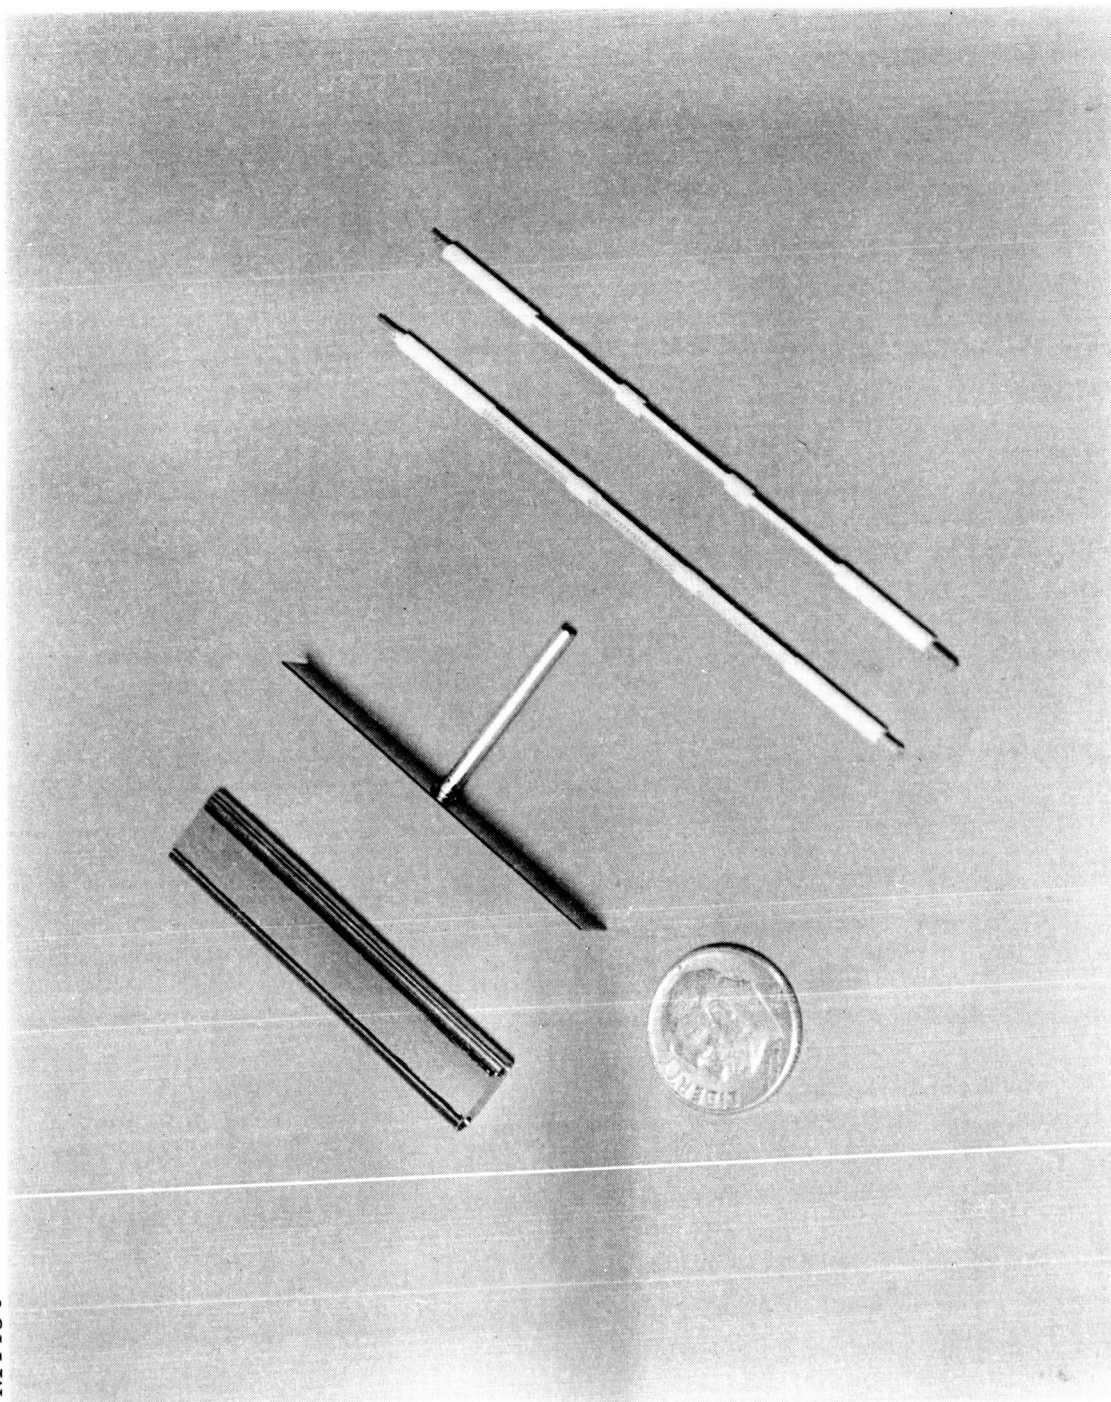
Low-mass ionizer parts in an intermediate stage of assembly.
